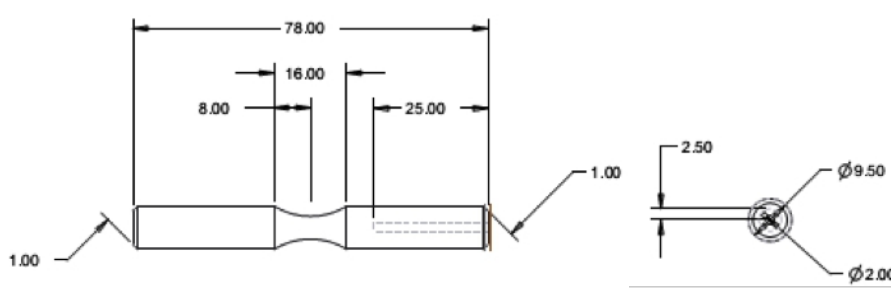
Tensile specimen geometry, dimensions in mm.
